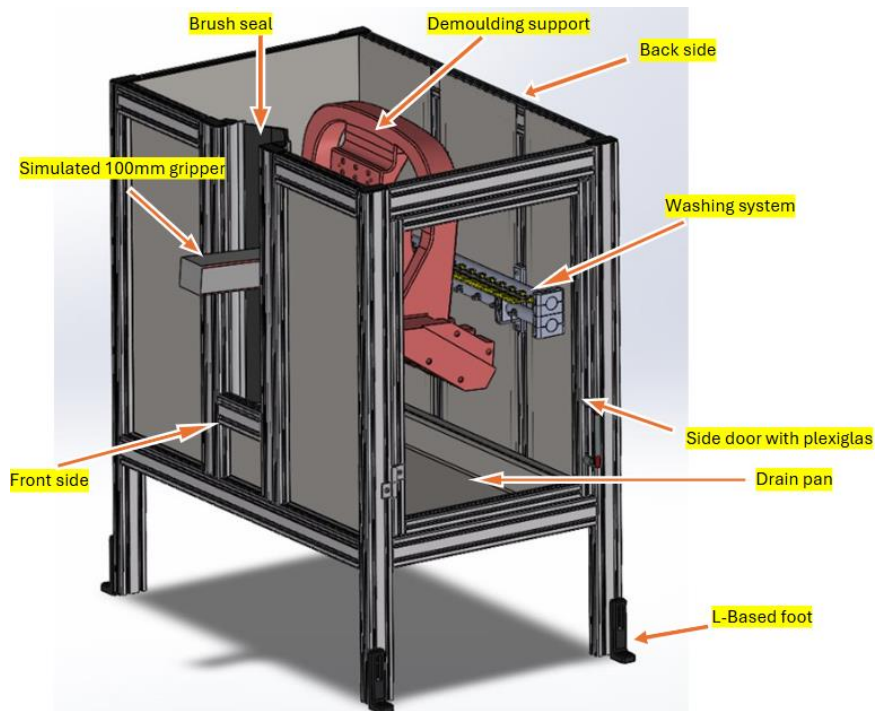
SolidWorks 3D model of the washing chamber design showing the aluminium profile frame, sheet metal panels, side access door, brush sealing system around the robot entry point, and the wash system implemented.
